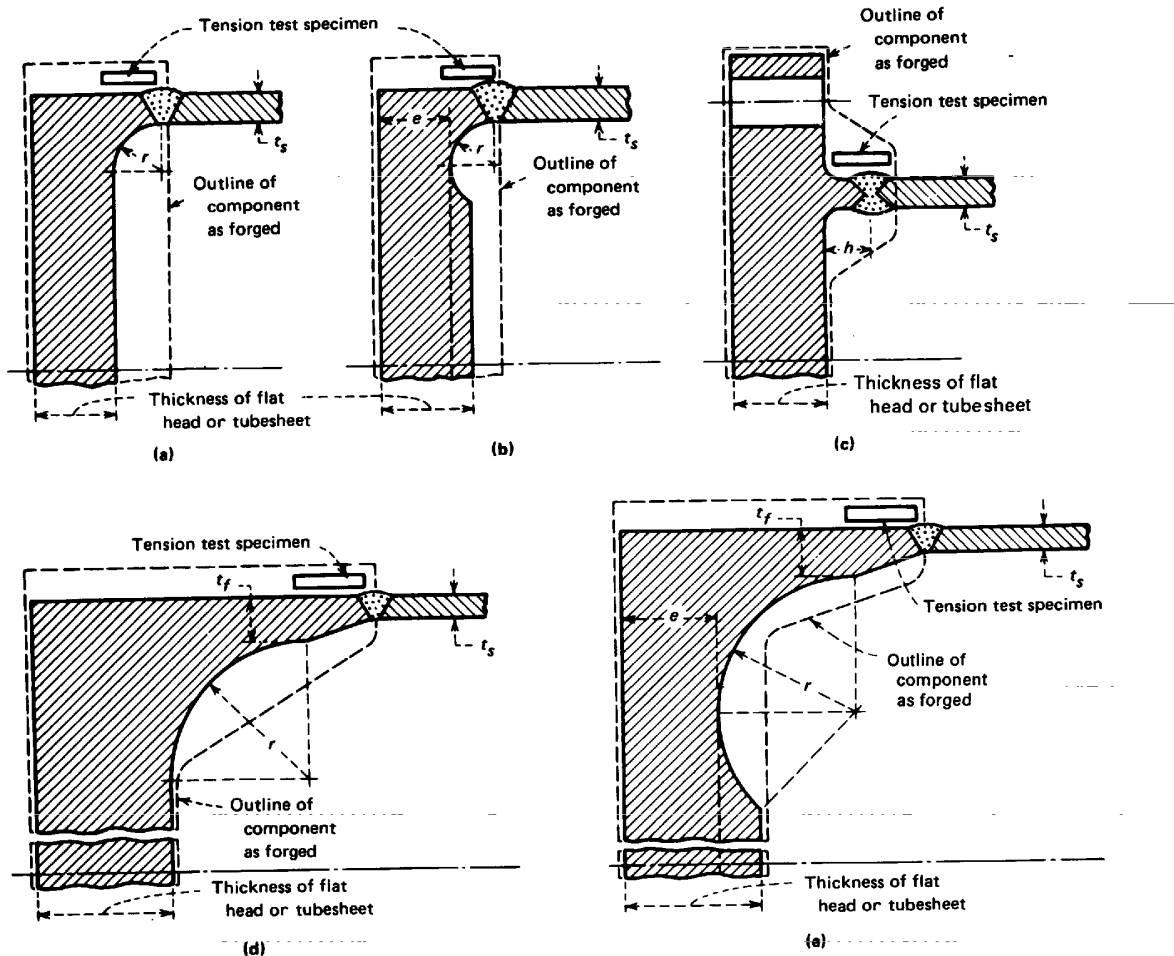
ACCEPTABLE TYPES OF FULL PENETRATION WELD DETAILS FOR CATEGORY C JOINTS
